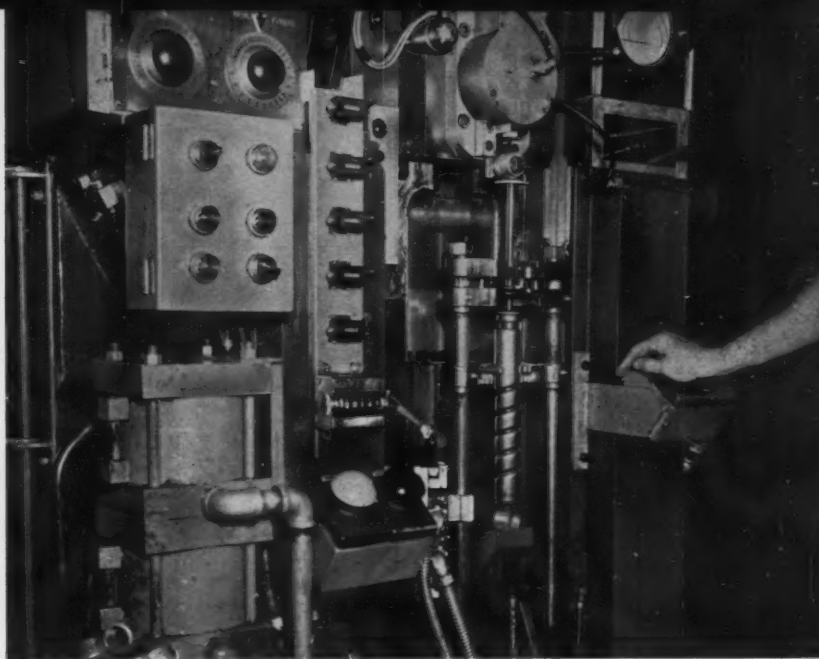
Shock absorbers are filled with a specified amount of hydraulic fluid as they rotate about machine column. Guard removed to show fixtures.
